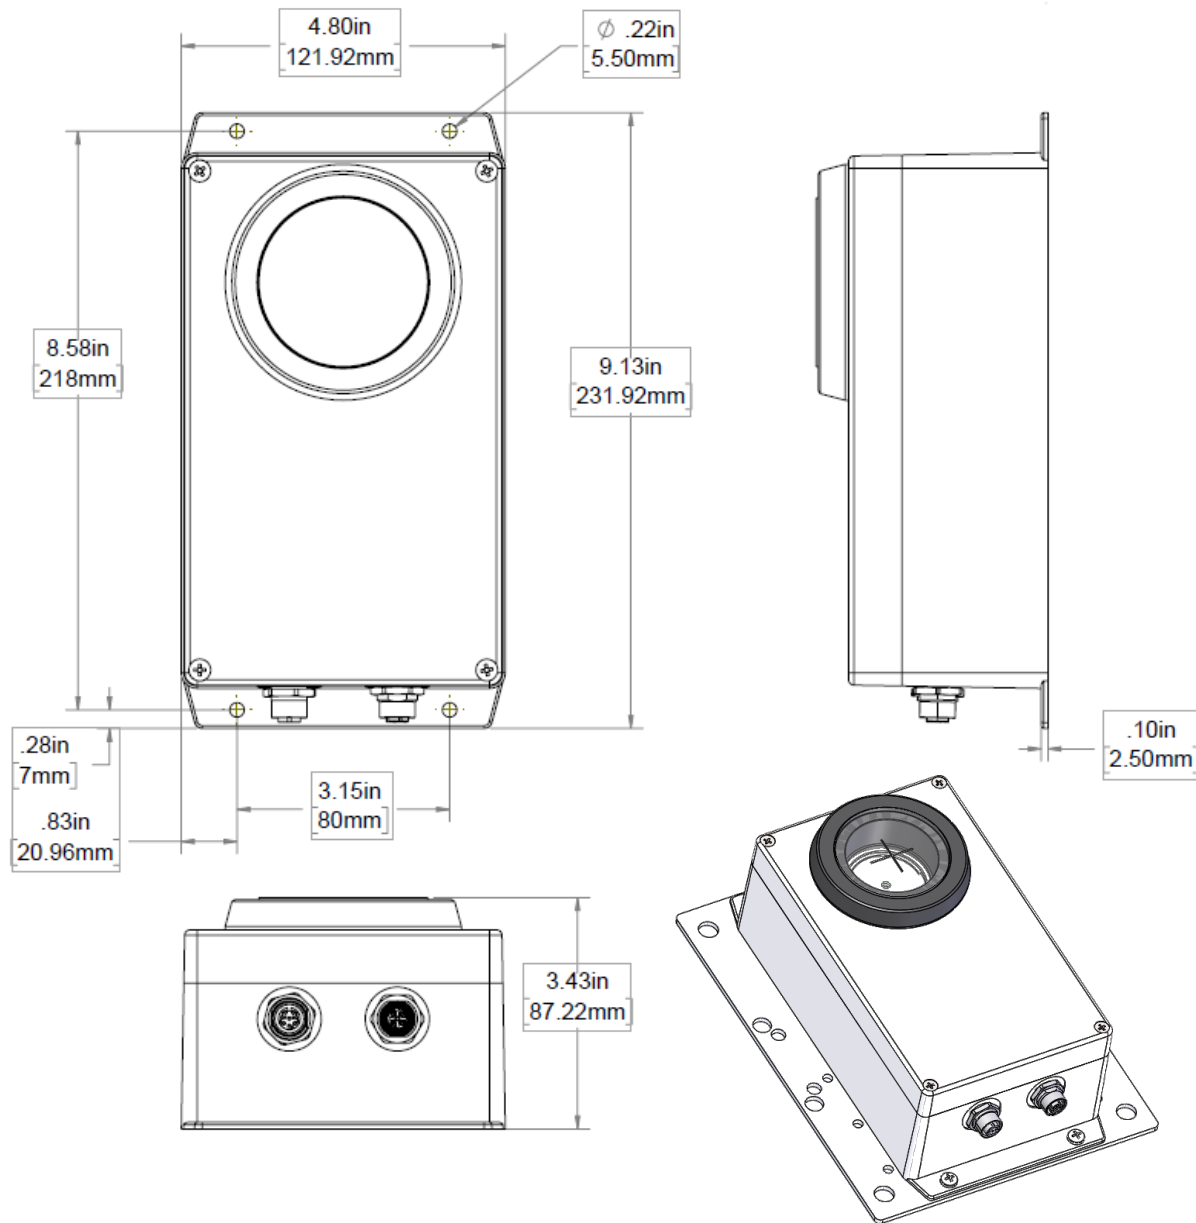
Optional flat mounting plate 610449 (sold separately)
